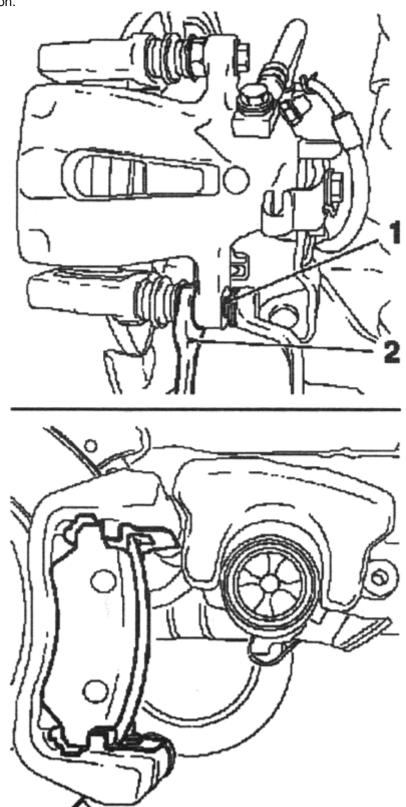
Setting special inst-rumenta on Support: 1 - caliper, 2 - adaptation
